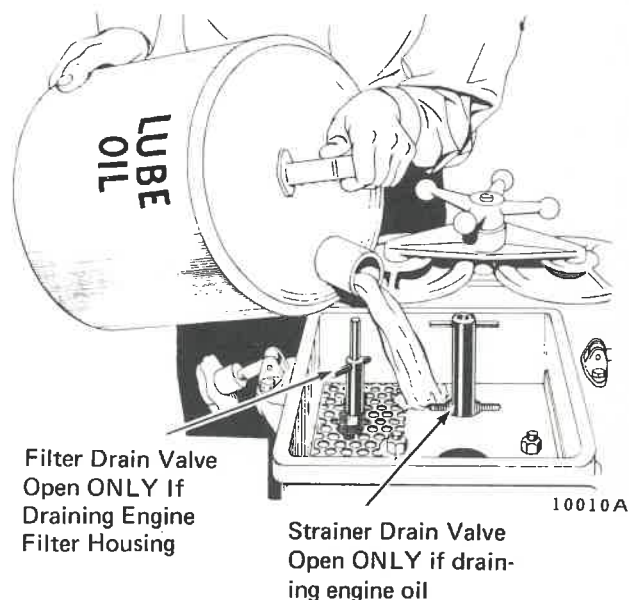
Adding Oil To Engine Through Strainer Housing
